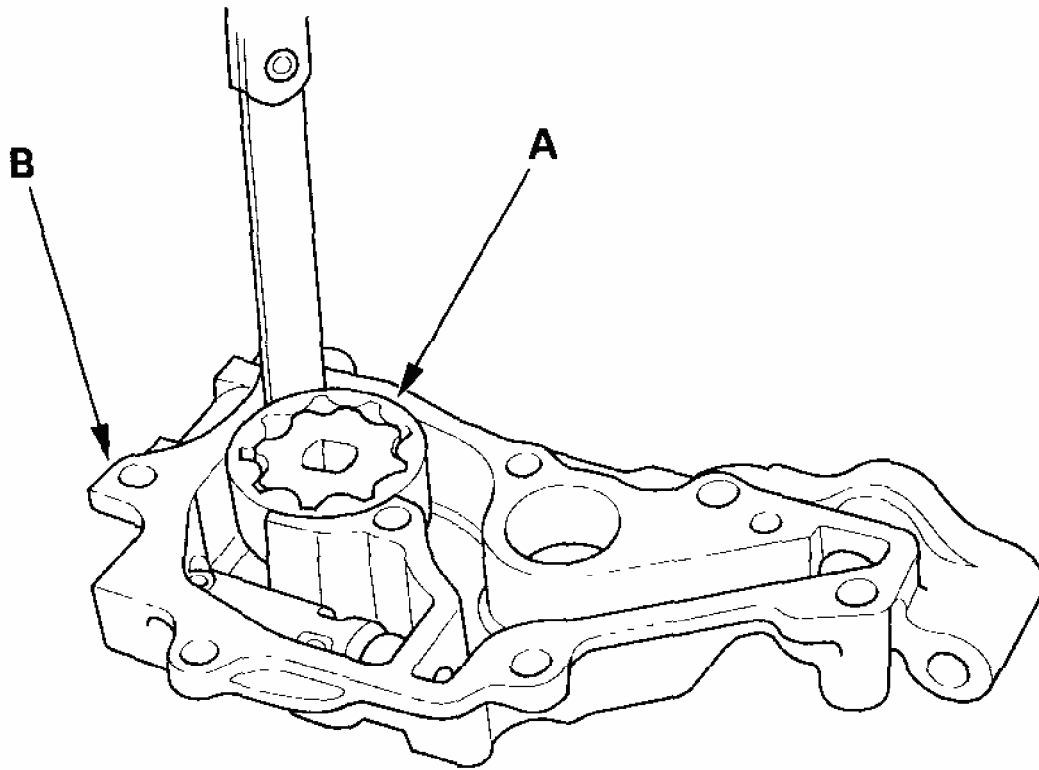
Checking Housing-To-Rotor Axial Clearance
